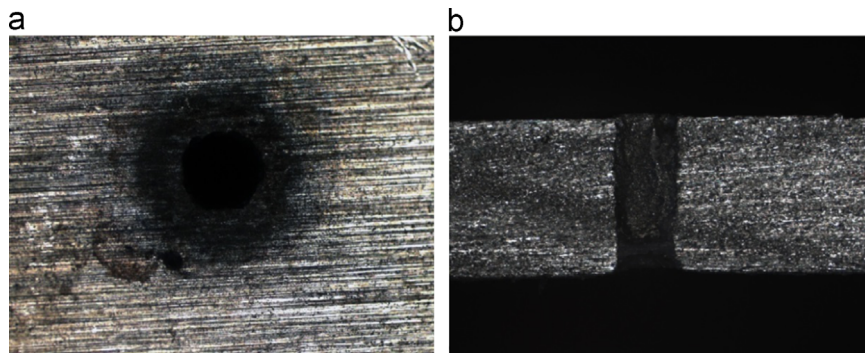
The initial small hole on the blank. (a) Top view and (b) section view.
